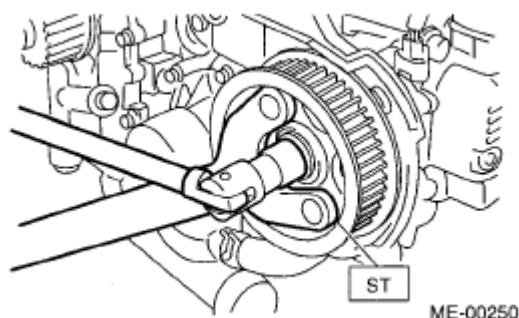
Identifying Cam Sprocket No. 2 Using Cam Sprocket Wrench ST (18231AA010)
